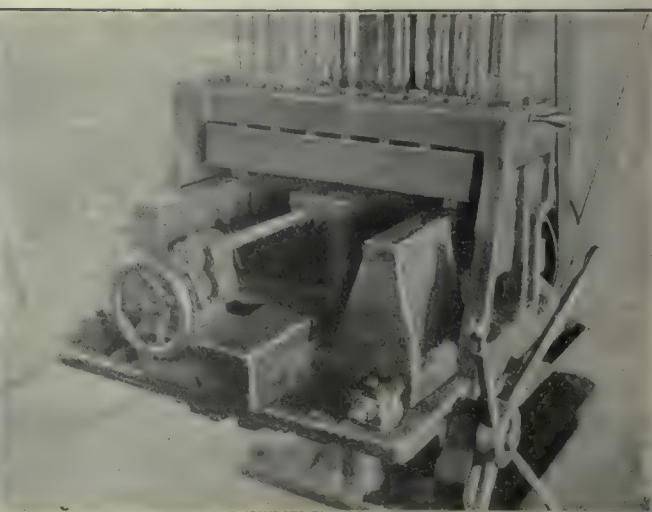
MACHINING UPPER SIDE OF CYLINDER HEAD
